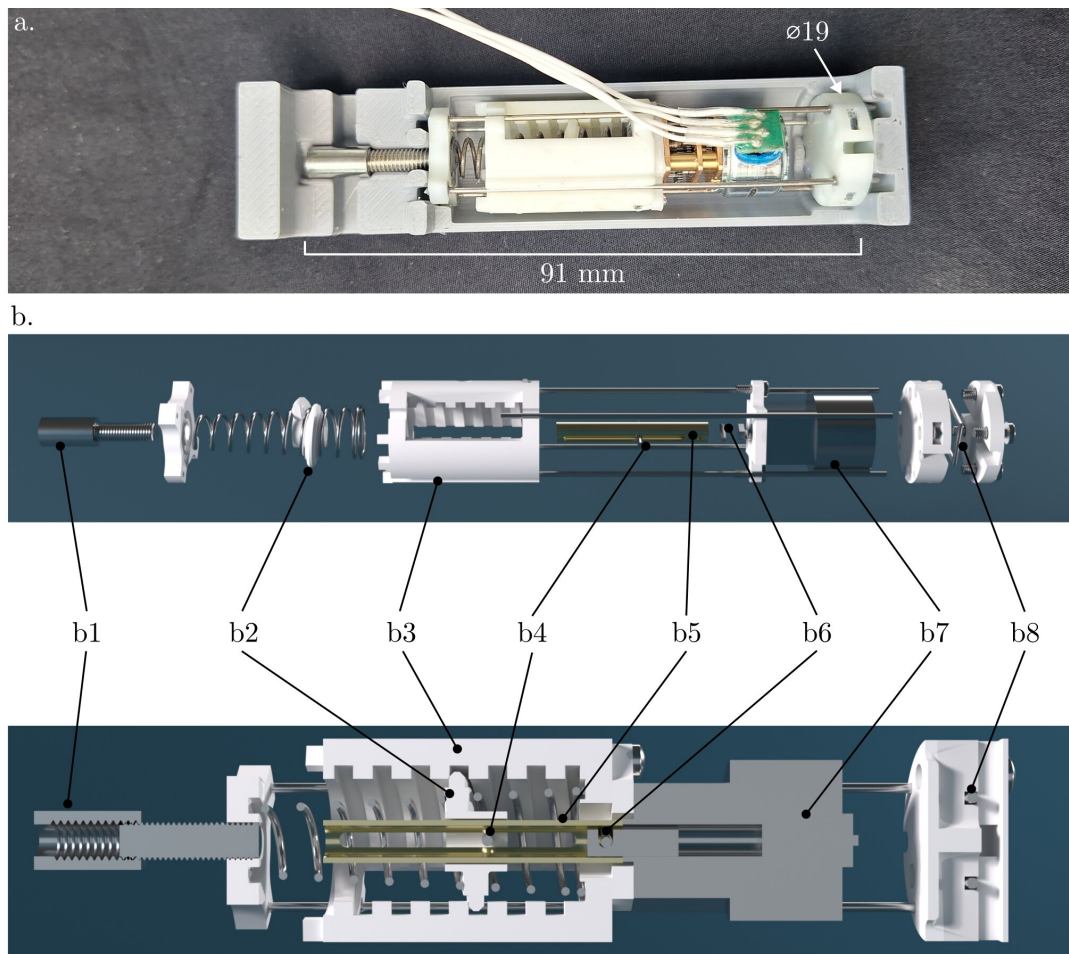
a. Prototype of the miniaturized variable stiffness mechanism in its storage case. b. Exploded and cut view of the VSM.
